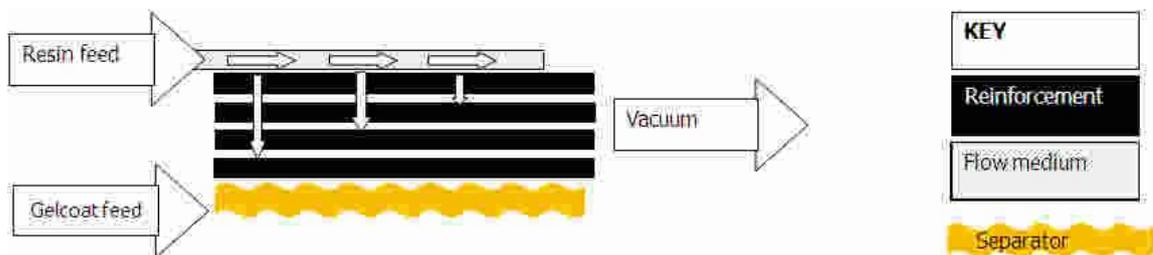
Schematic representation of Type II infusion with a flow medium and through-plane flow process, and a separator layer for in-mould gel-coating (the bagging film (above) and mould tool (below) are omitted for clarity)
